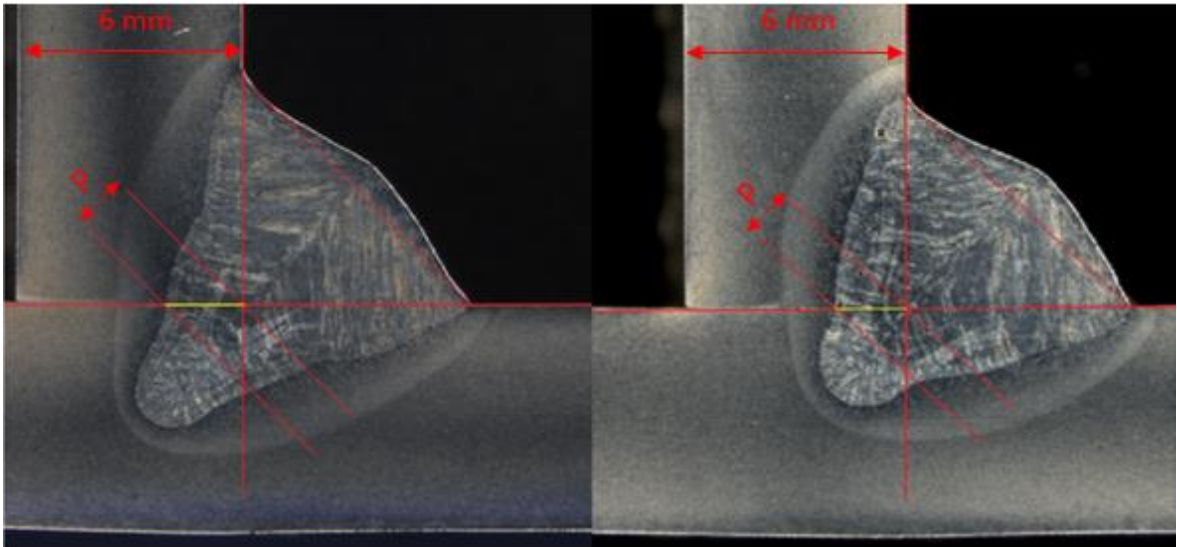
Penetration depths of 60A/500Hz and 150A/250Hz weld beads.
